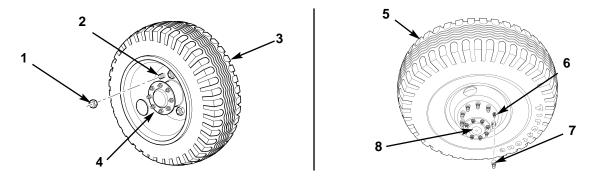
Removing Wheels from Rear-Rear Axle Hubs.
